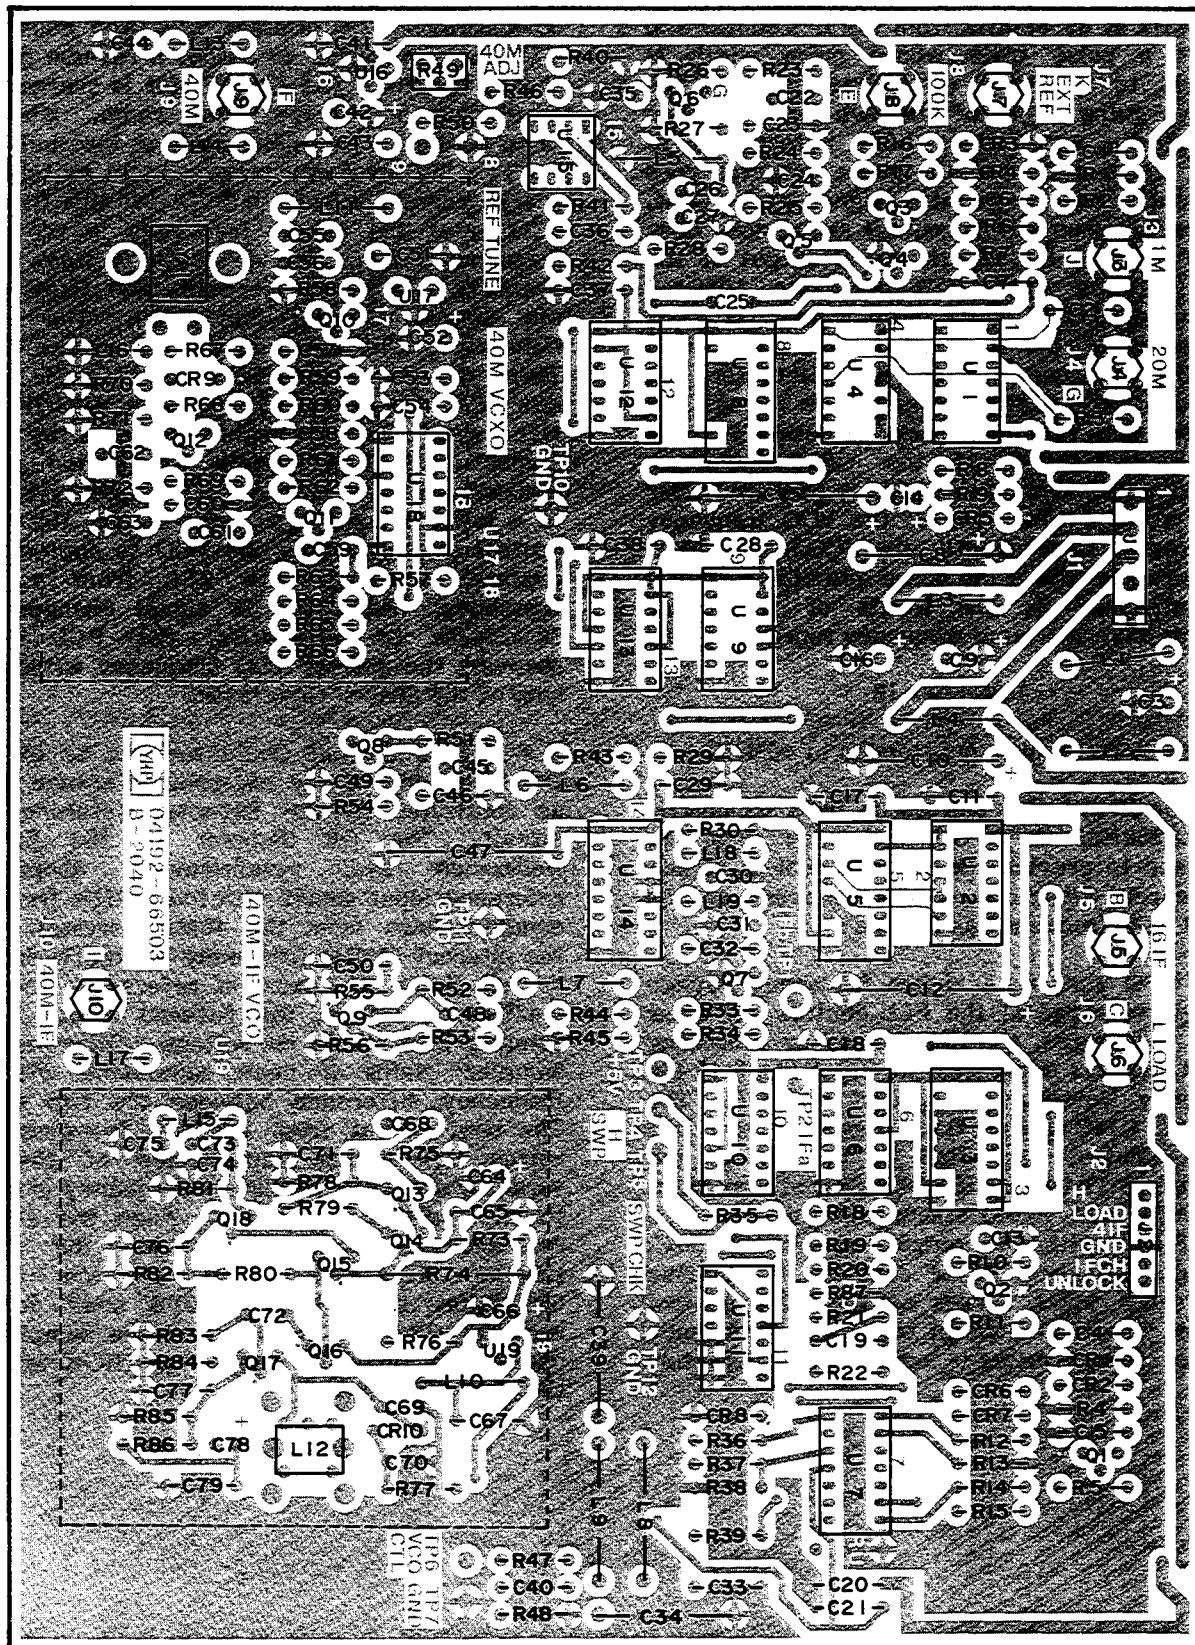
A3 Reference Frequency Generator Board Assembly Component Locations.
